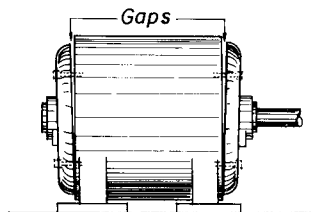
A motor showing end plates not mounted properly. This prevents the rotor from turning. Use a mallet to tap plates into position.
